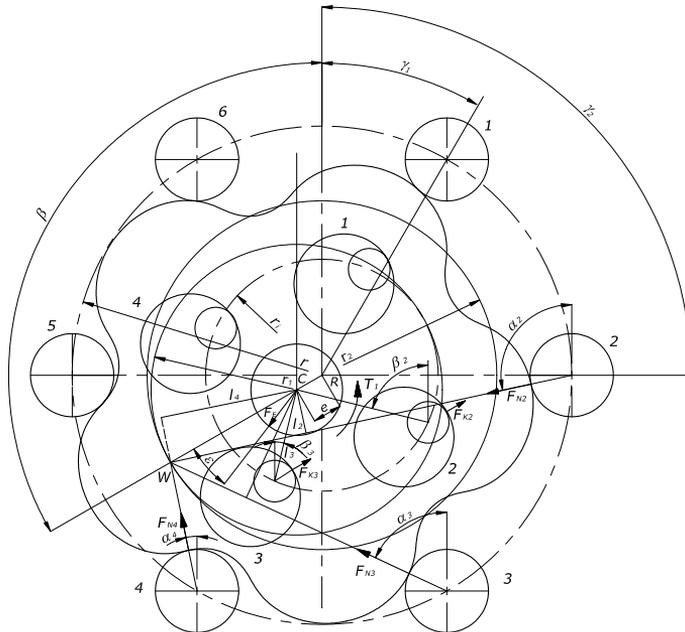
Cycloid disc in contact with housing rollers and output rollers
